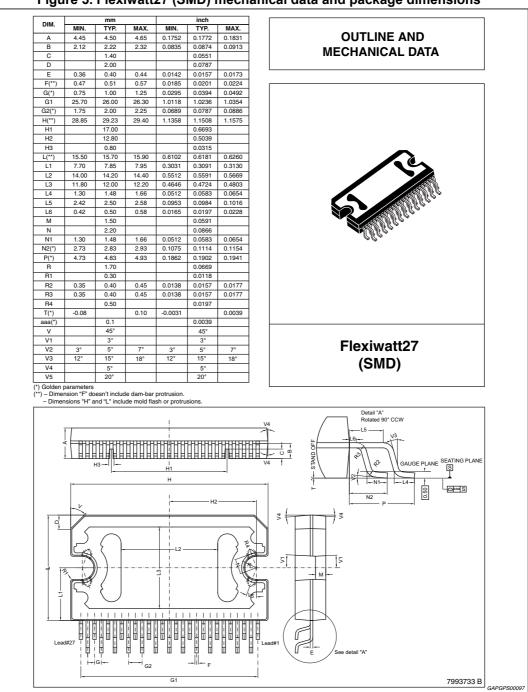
Flexiwatt27 (SMD) mechanical data and package dimensions
